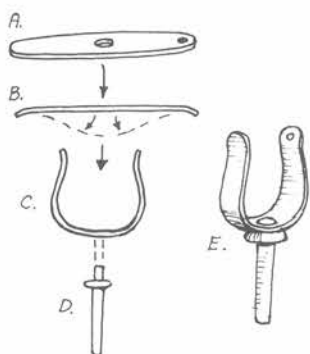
Rowlock fabrication. A photo-etched plate (A) is formed to make the rowlock horns (B and C), which are soldered or riveted to the pin (D). E, completed assembly. The hole at the end of one horn is for a lanyard.
